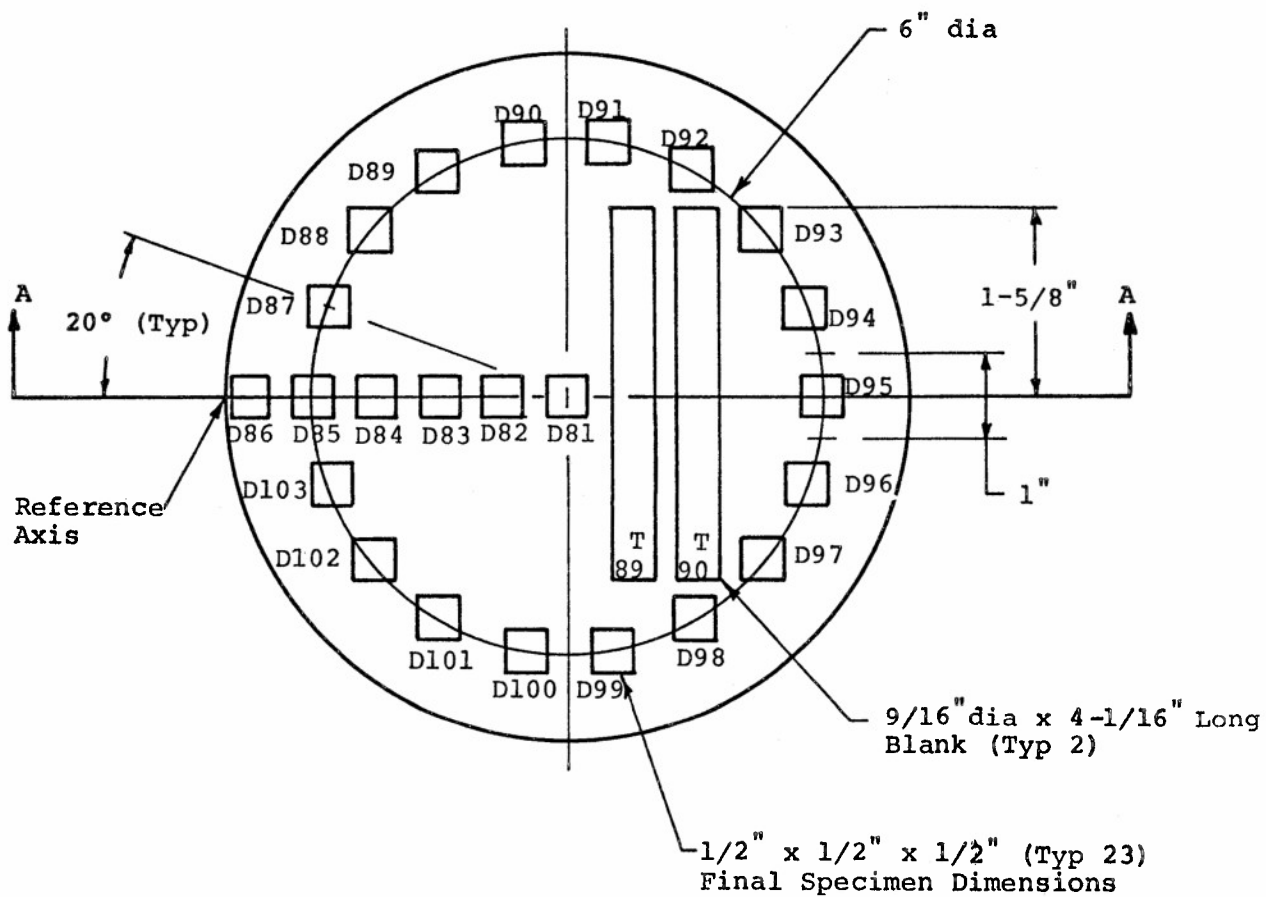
Specimen Blank Layout for Slab 6 of ATJ-S Billet L-4-6
